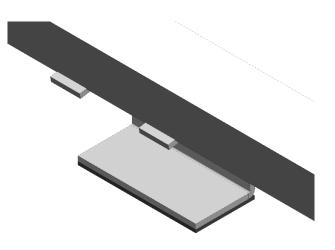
HCM Bottom Support Secured to Panel Flange
